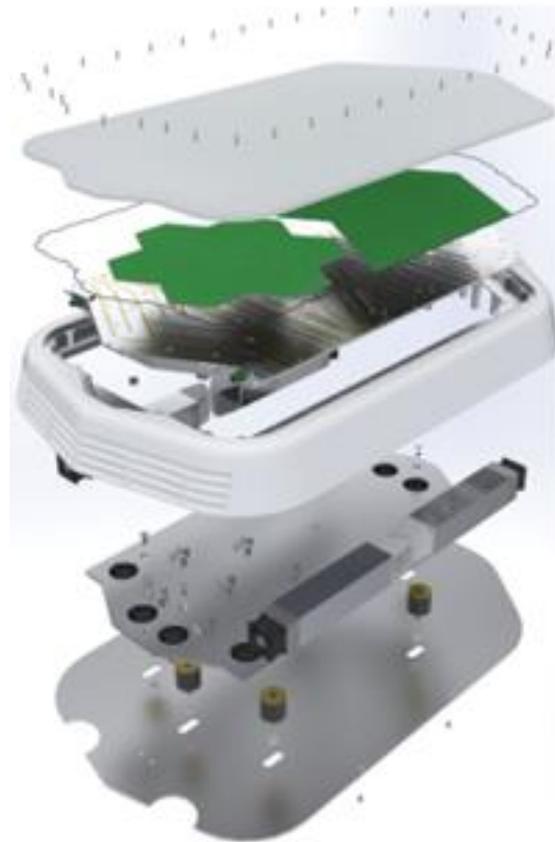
Phased antenna array for land mobile applications - exploded view. The total height of the terminal is below 11cm, but it can go even lower for the future designs.
